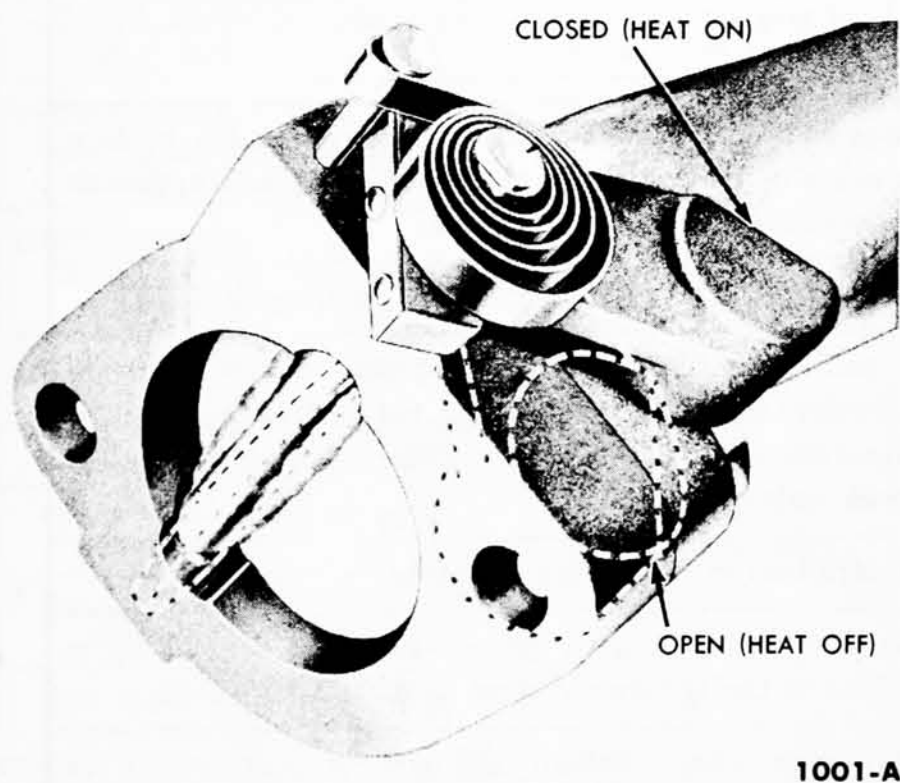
Exhaust Gas Control Valve—8-Cylinder Engines
